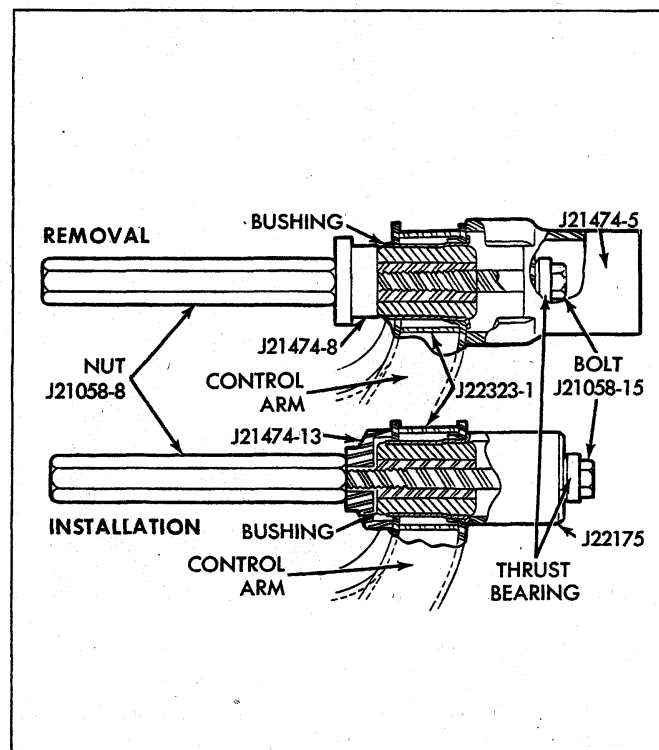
Lower Control Arm Bushing - Large - Chevelle & Camaro
